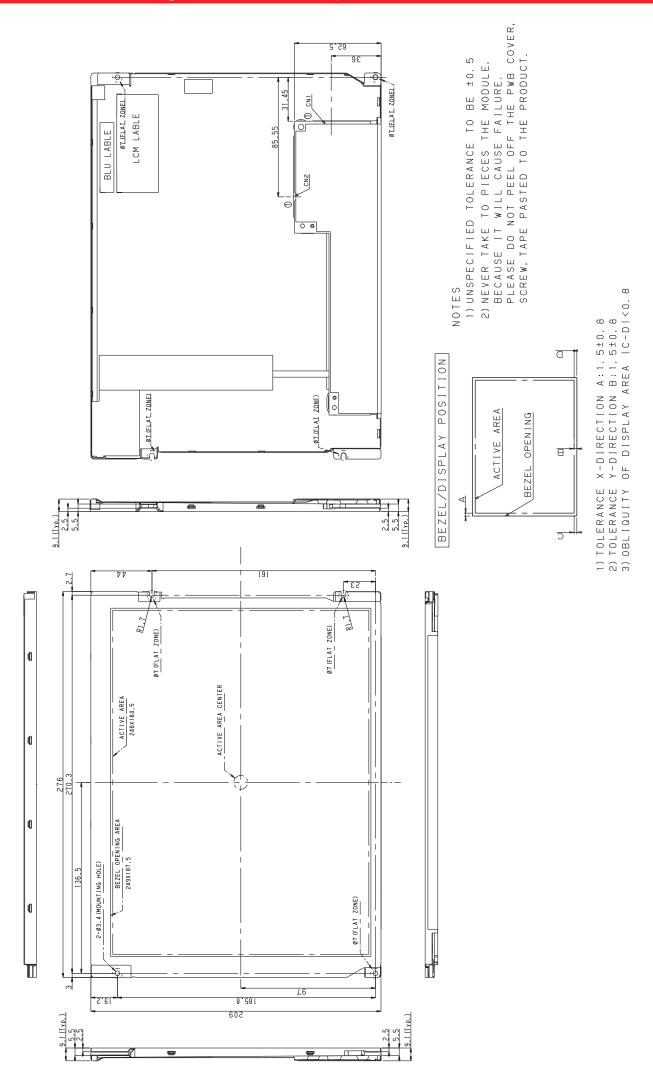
LQ121S1LG88 OUTLINE DIMENSIONS
